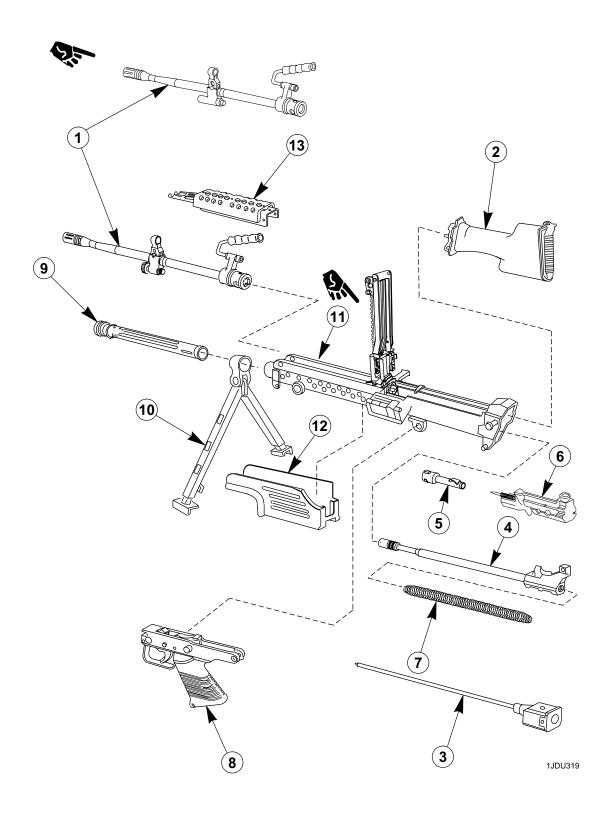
MACHINE GUN, 5.56MM, M249 W/EQUIP.
